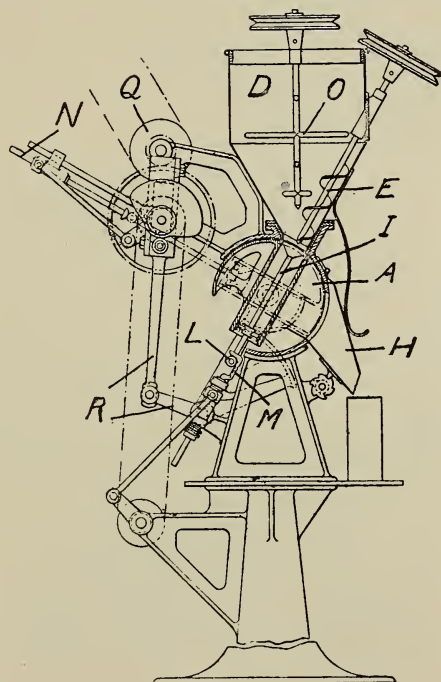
AUTOMATIC MEASURING MACHINE.
